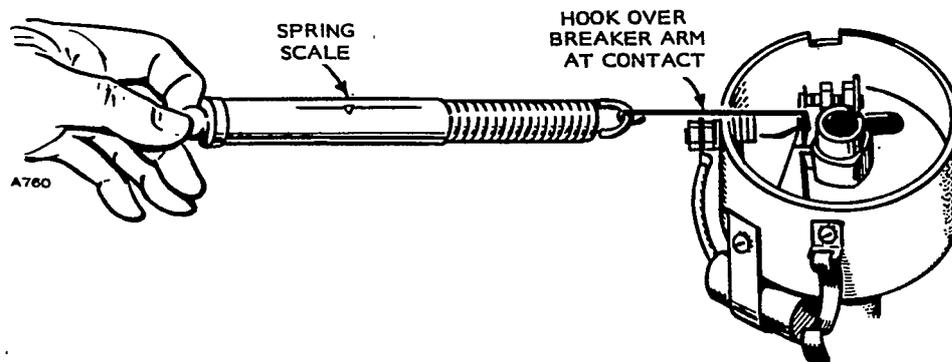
CHECKING BREAKER POINT SPRING TENSION
